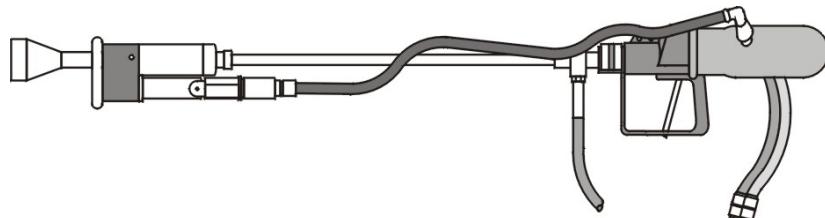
Air driven rotary gun, with plastic throttle handgrip
